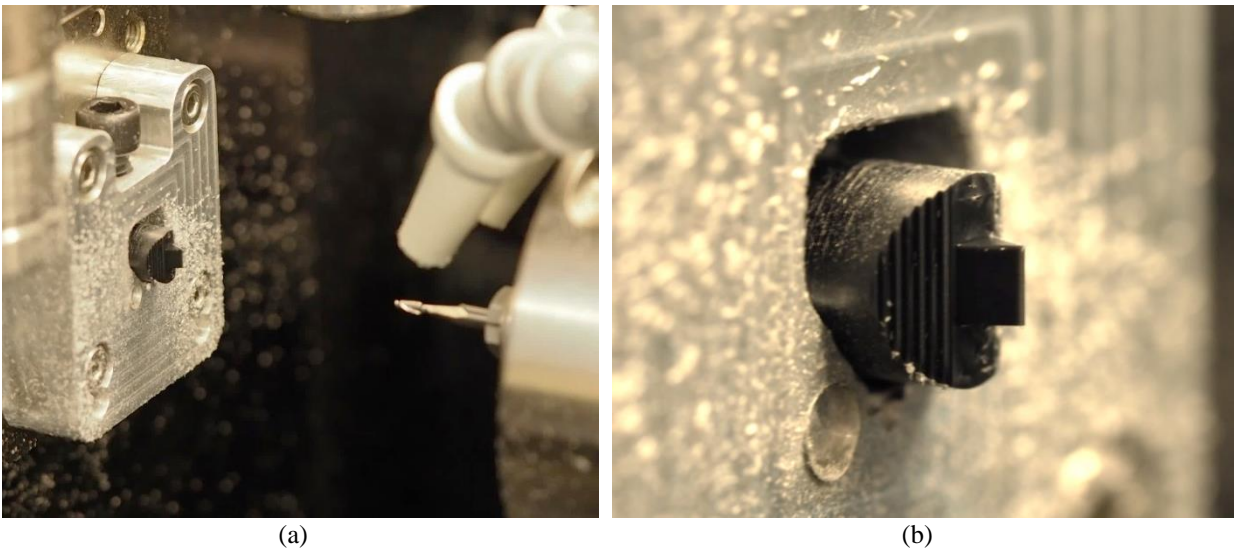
Delrin stepped specimen machining in custom pallet fixture in a Microolution 363-S micromachining center. (a) The stepped specimen just after machining and (b) close up of the specimen
